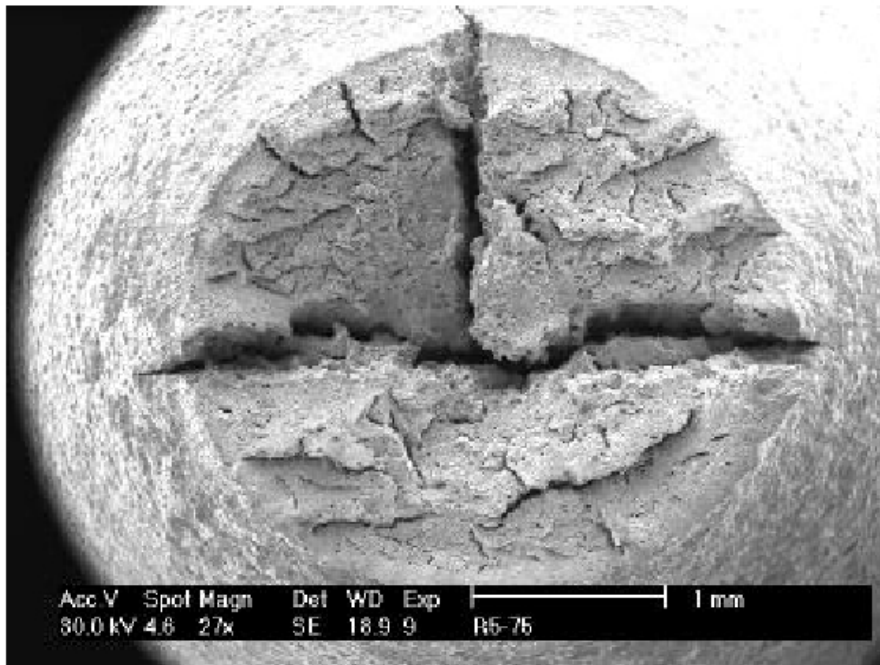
Axial cracks on fracture surface of 5mm notched specimen tested at  $-75^{\circ}\text{C}$ .
